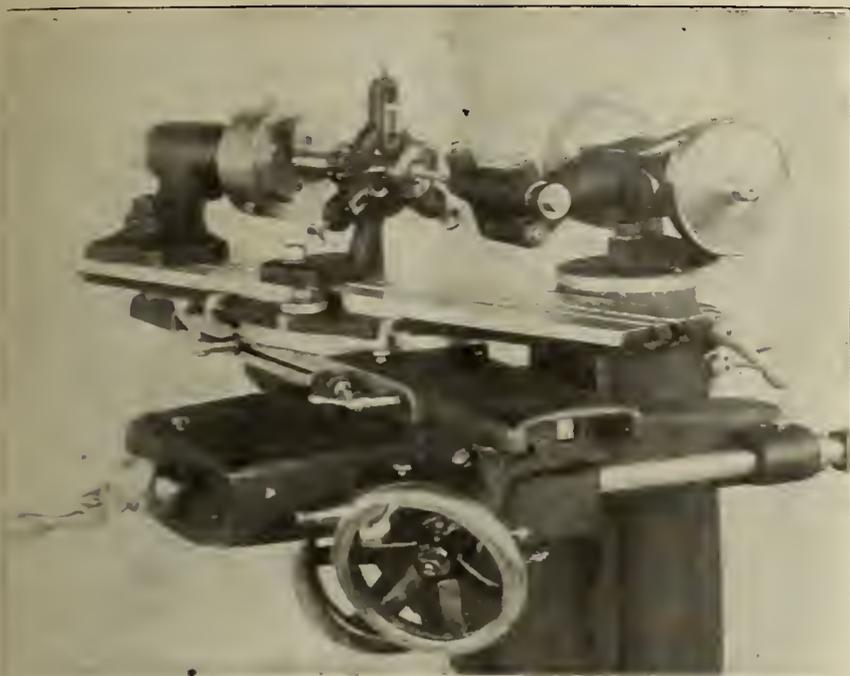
SHOWING INTERNAL GRINDING ATTACHMENT.
